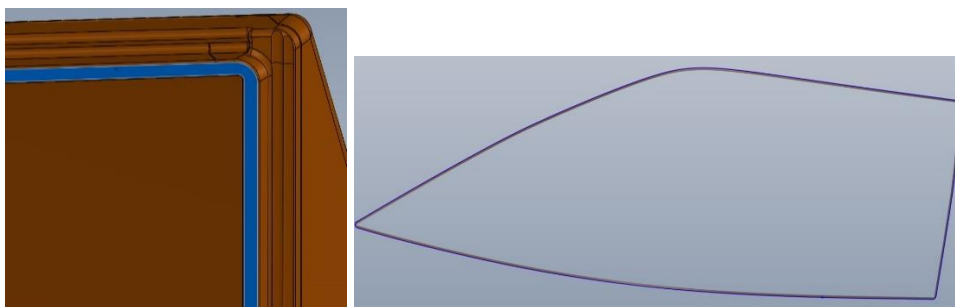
a) Welding rib individuated in the light tail; b) Off-set of the entire welding rib
